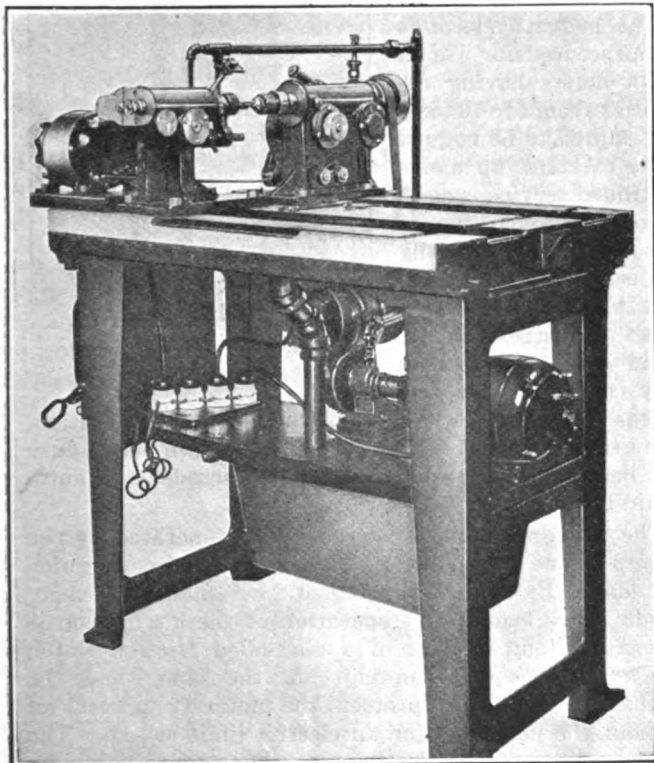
KINGSBURY AUTOMATIC SENSITIVE DRILLING MACHINE
